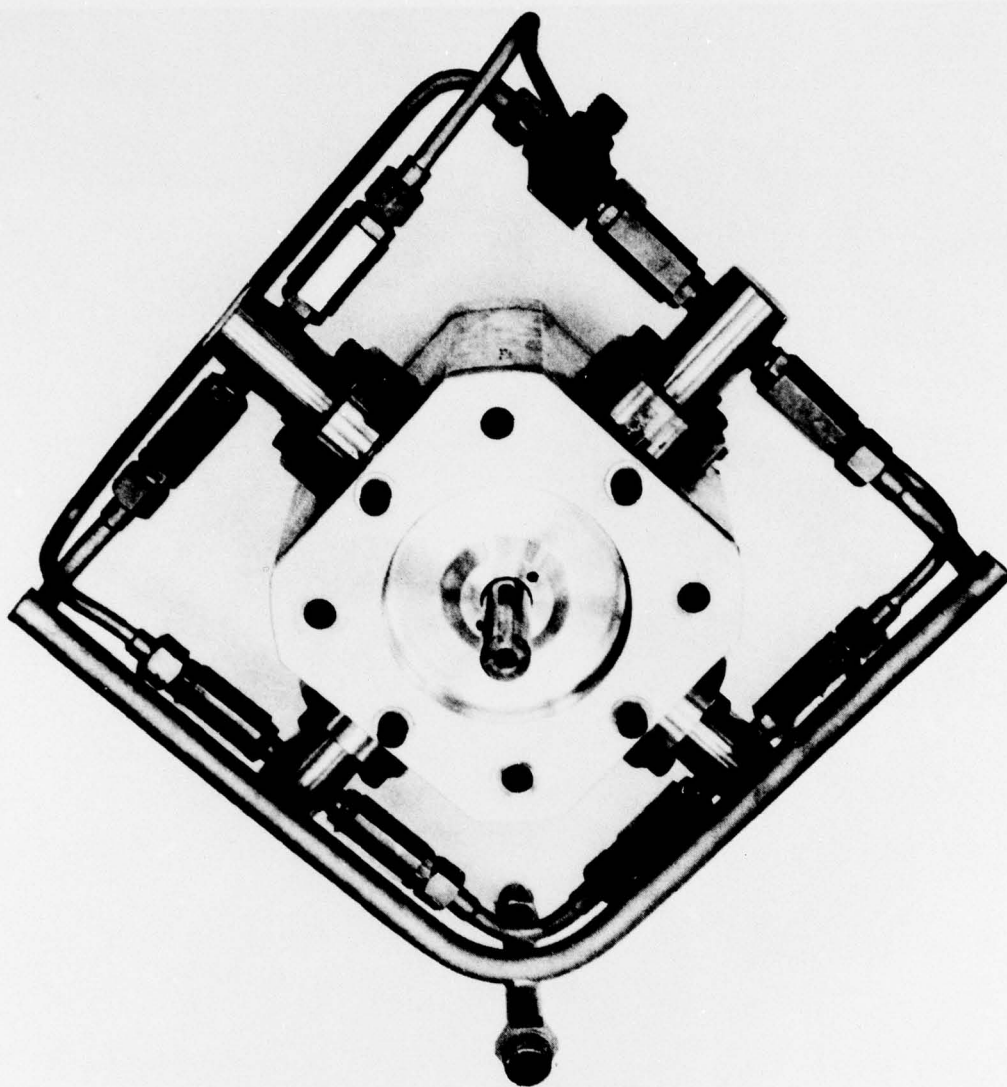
FRONT VIEW OF REDUCED SCALE SHOWING ORIENTATION OF PUMP AND LAYOUT OF CYLINDERS, CHECKVALVES AND PIPING
